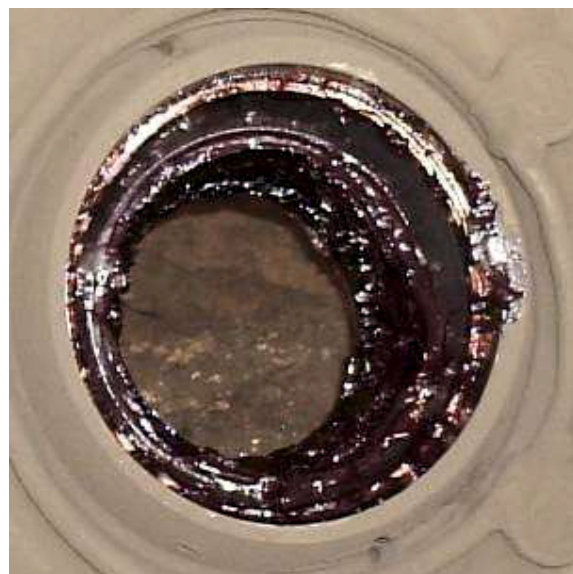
Rear Left Hand Side Wheel Bearings & Wheel Hub of Vehicle – 1.
